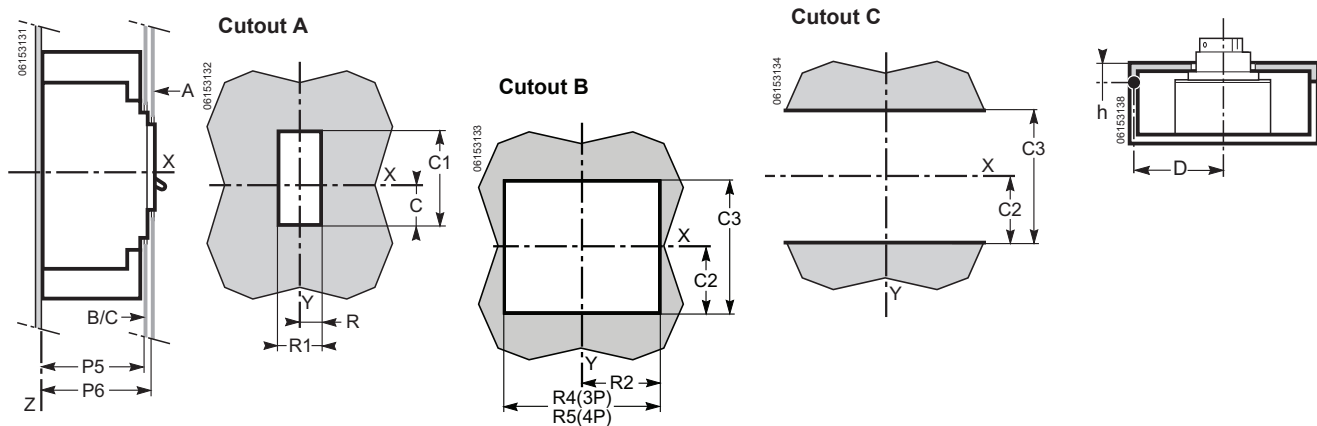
Circuit Breaker Dimensions / Dimensiones del interruptor automático / Dimensions du disjoncteurs
